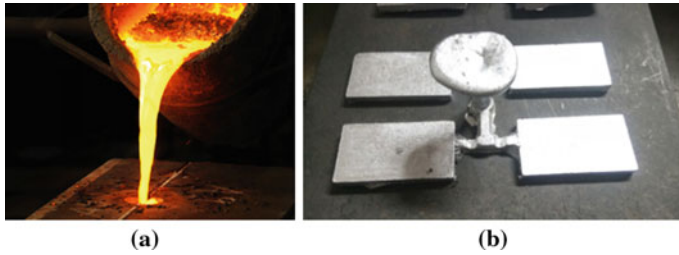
a Pouring of molten metal, b Metal plates cut for ASTM standards
